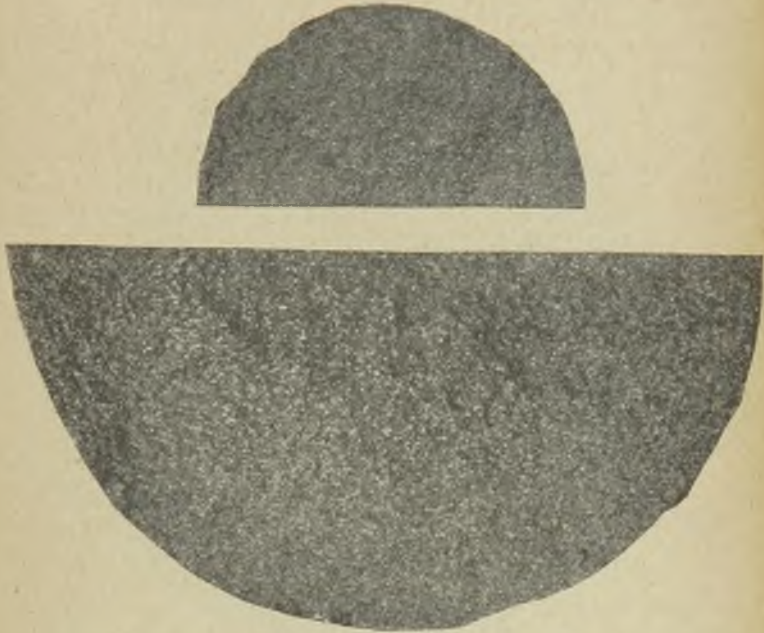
FRACTURES FROM PISTON RING IRON, ALL CAST FROM THE SAME IRON. ACTUAL SIZE.
